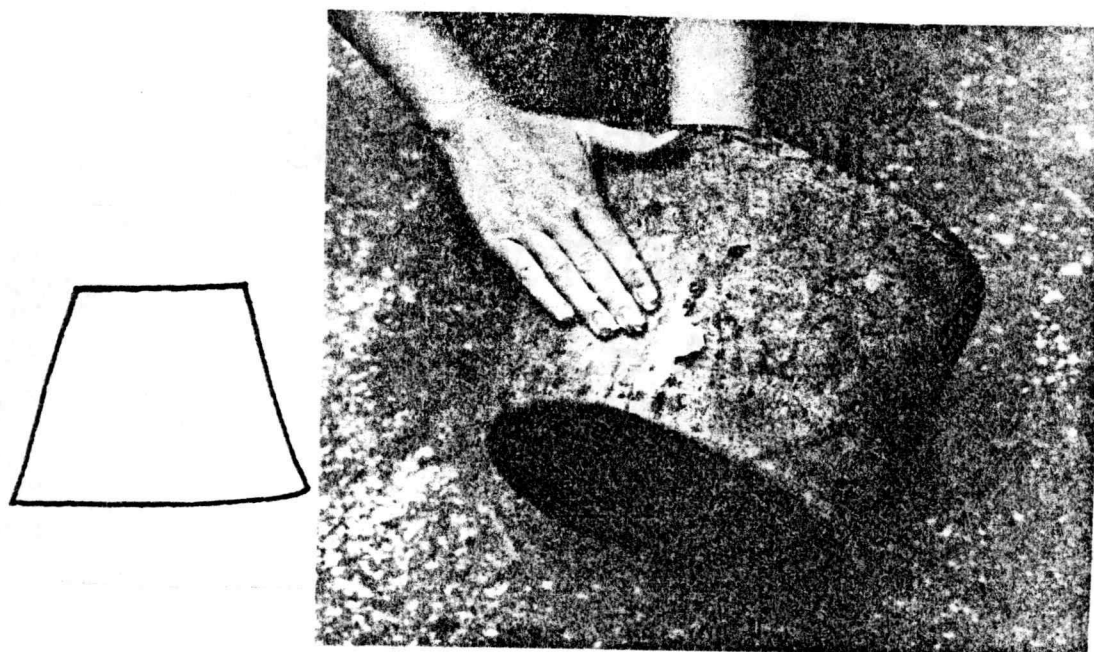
Left, Cross-Section Drawing of Rawhide Mould. Right, Rawhide Mould Being Greased with Fat.
